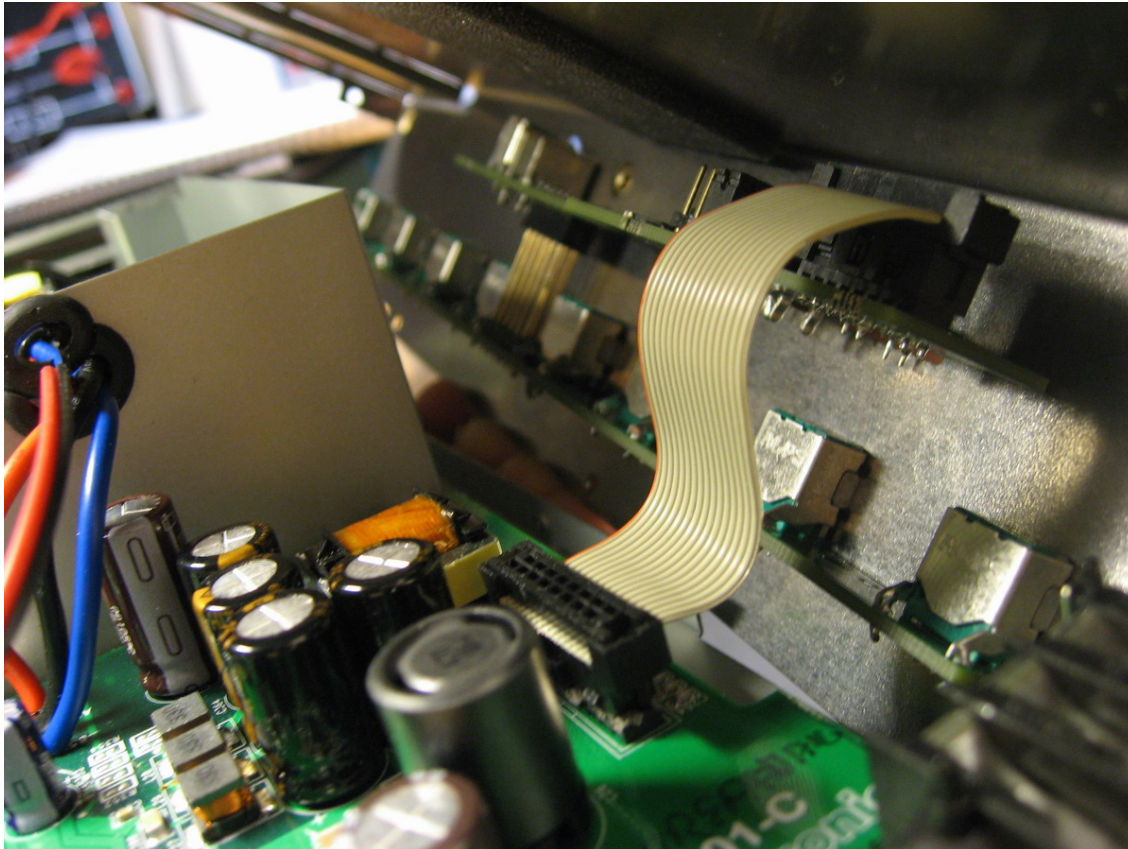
Mount the ribbon cable to the main board as shown in the picture.
